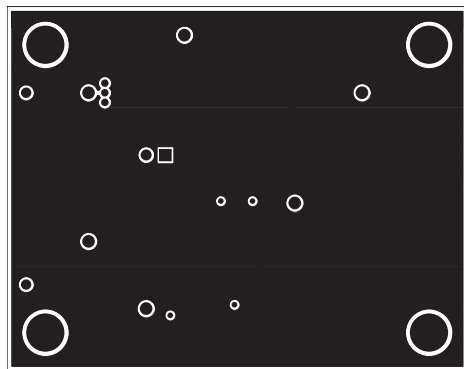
MAX16977 EV Kit PCB Layout—Layer 3
